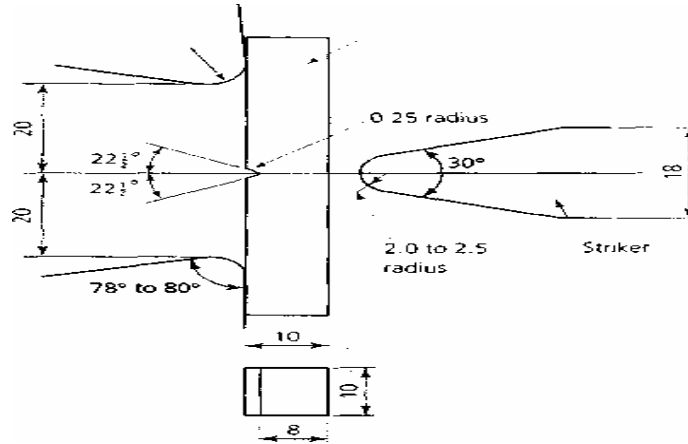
Chirpy test (all dimensions in millimeters) *Testing of Fatigue
